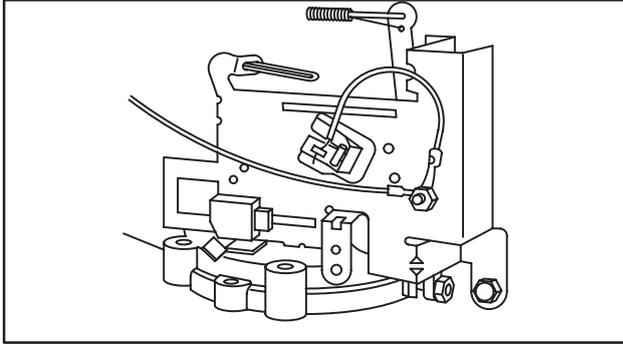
194700, 195700, 196700, 254700, 257700, 258700, 259700, 28A700, 28B700, 28C700, 28D700, 28E700, 28M700, 282700, 283700, 285700, 286700, 288700, 289700 with Horizontal Rack & Pinion control for Briggs & Stratton/Walbro LMT Carburetors
